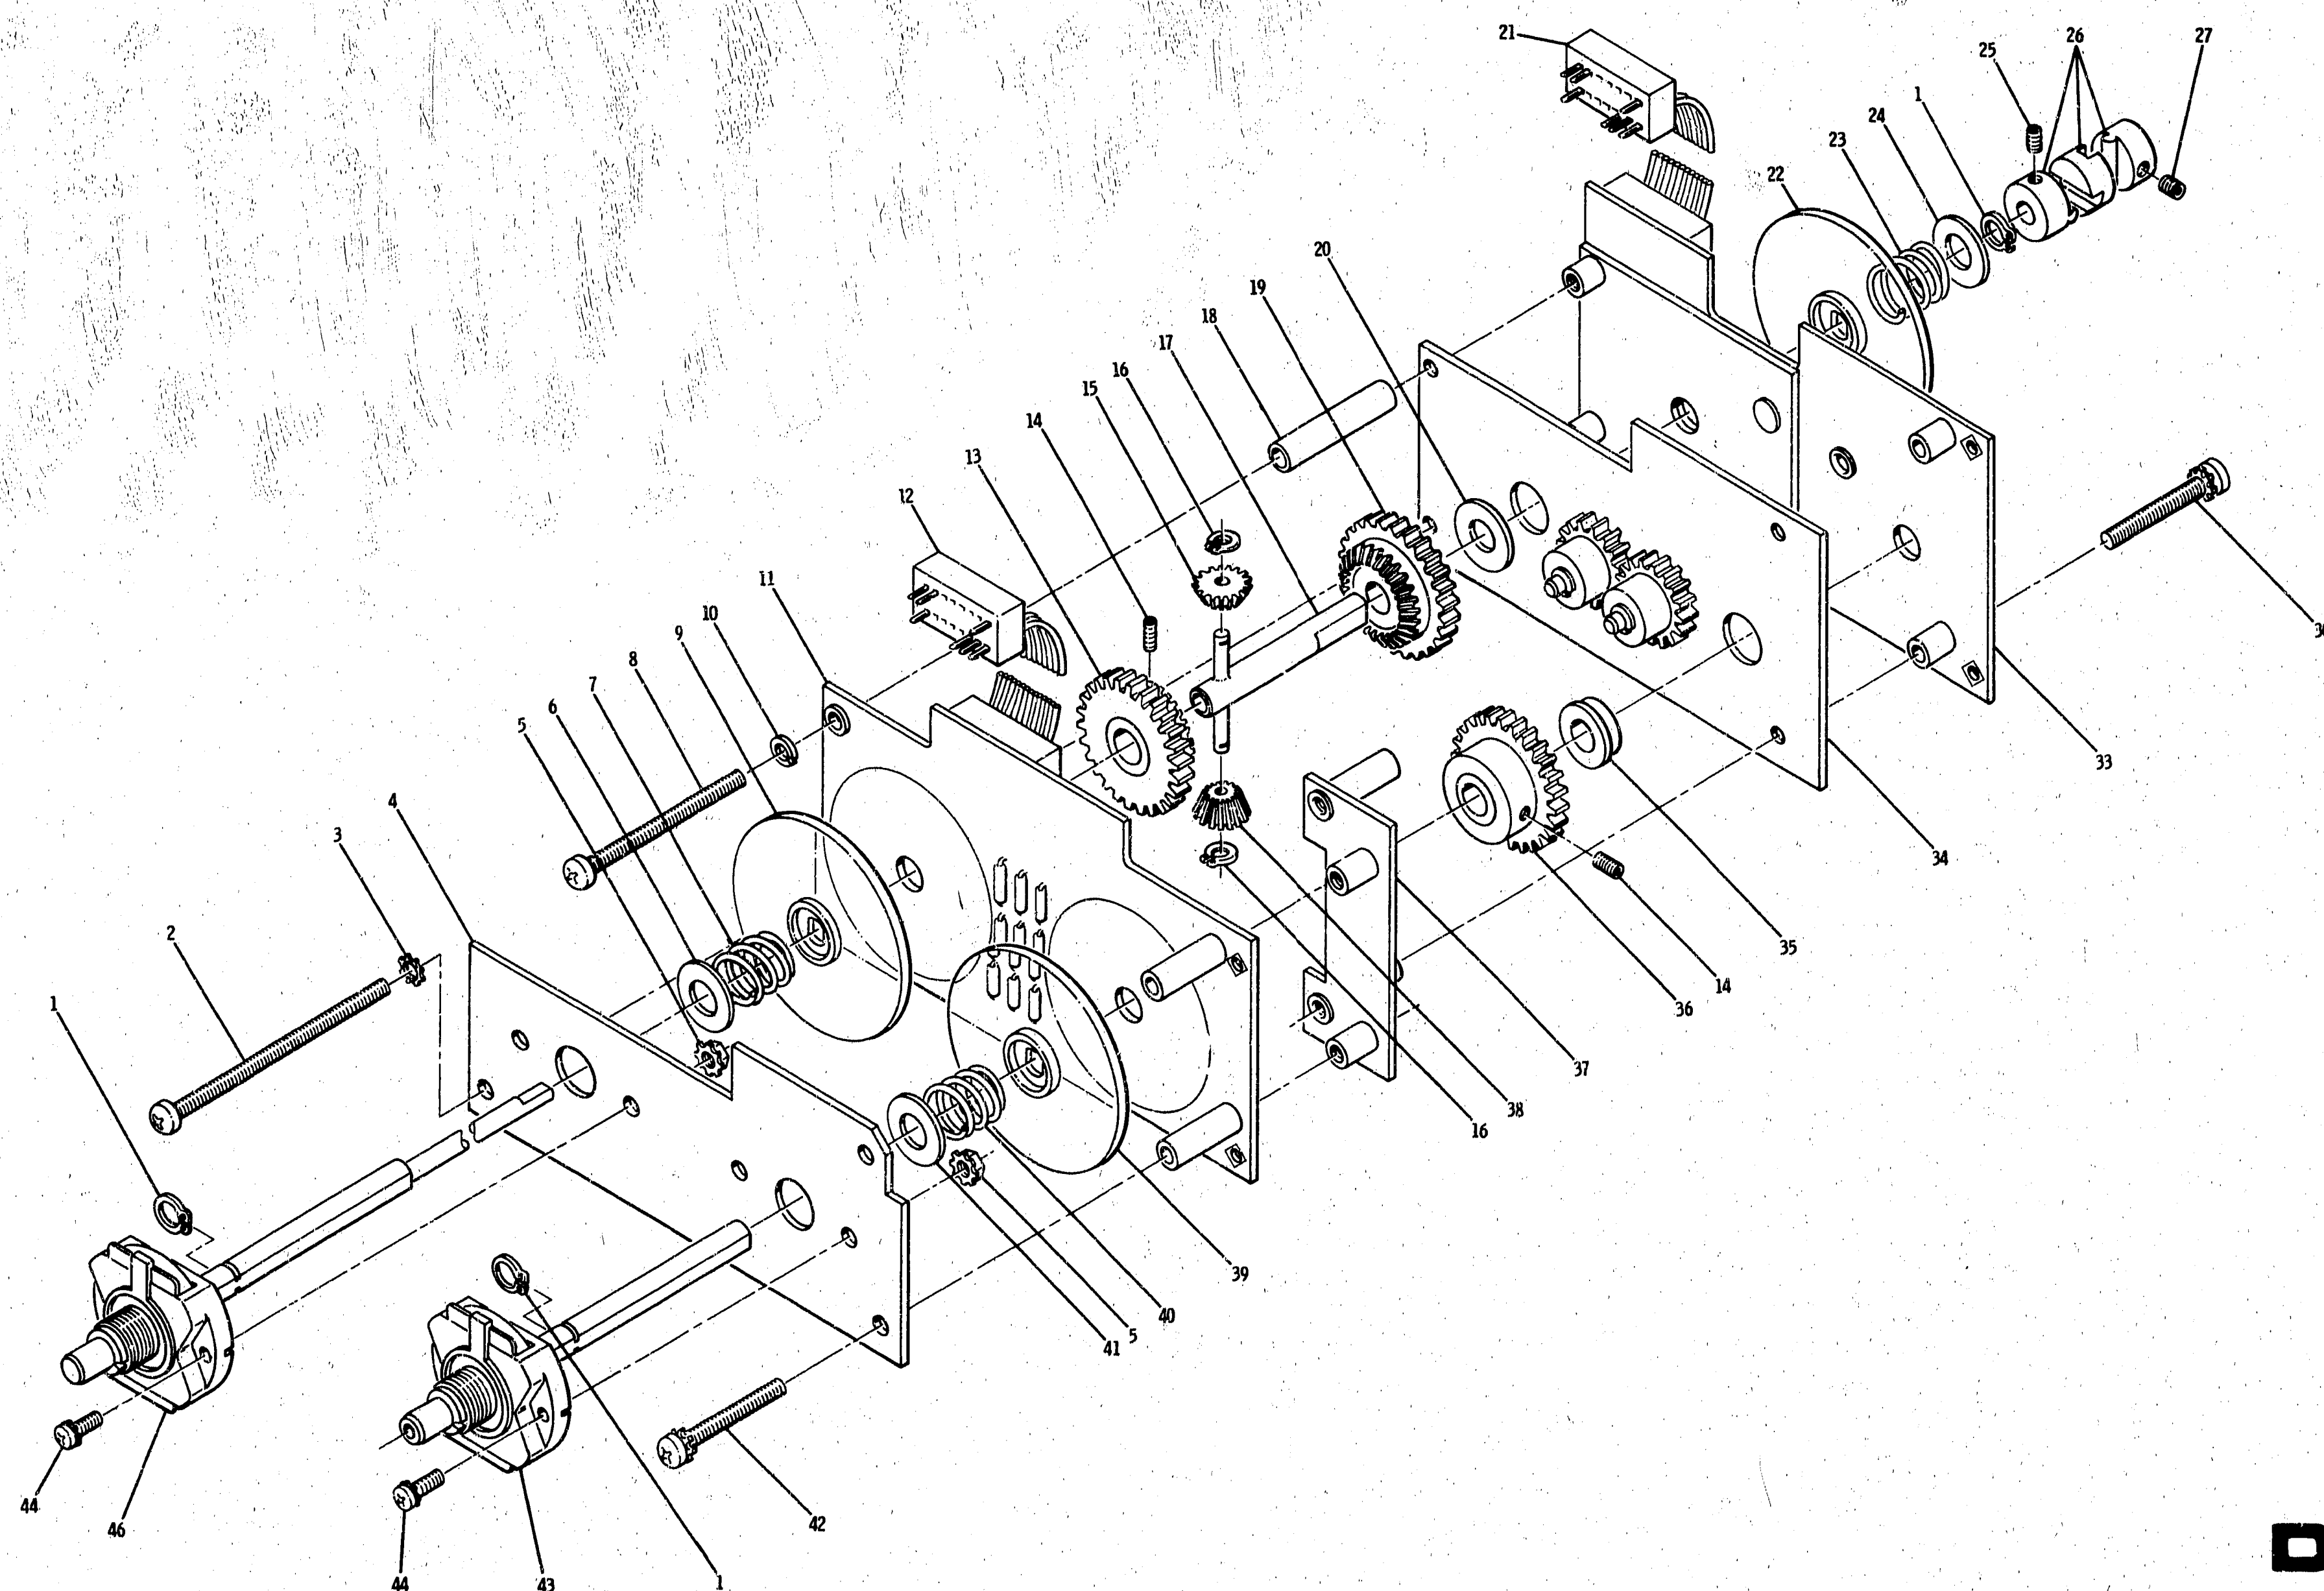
A9 Peak Deviation and Range Switch Assembly Illustrated Parts Breakdown
